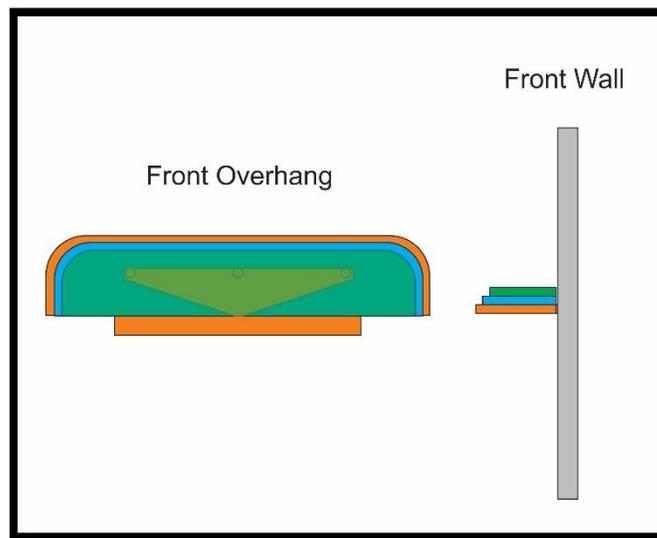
ASSEMBLING THE FRONT DETAILS
